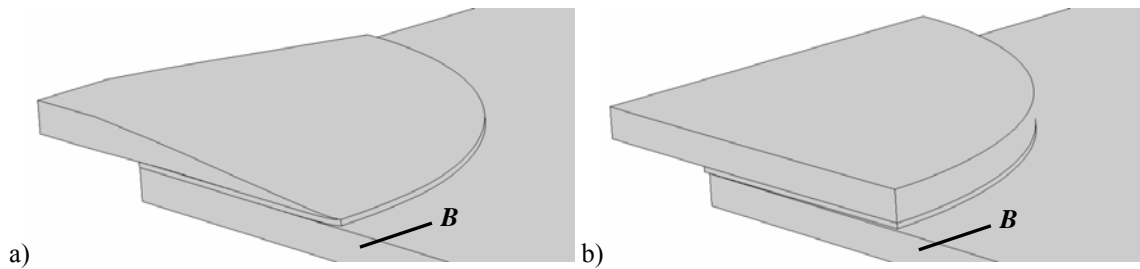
Deformed shape of the standard (a) and 1.2 mm patch outer chamfer (b) repairs (tensile load).
